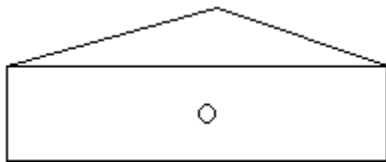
Side view of the launch pad base showing the 7/16 inch hole. Drill a hole in each side. Centering the hole by eye is adequate.
